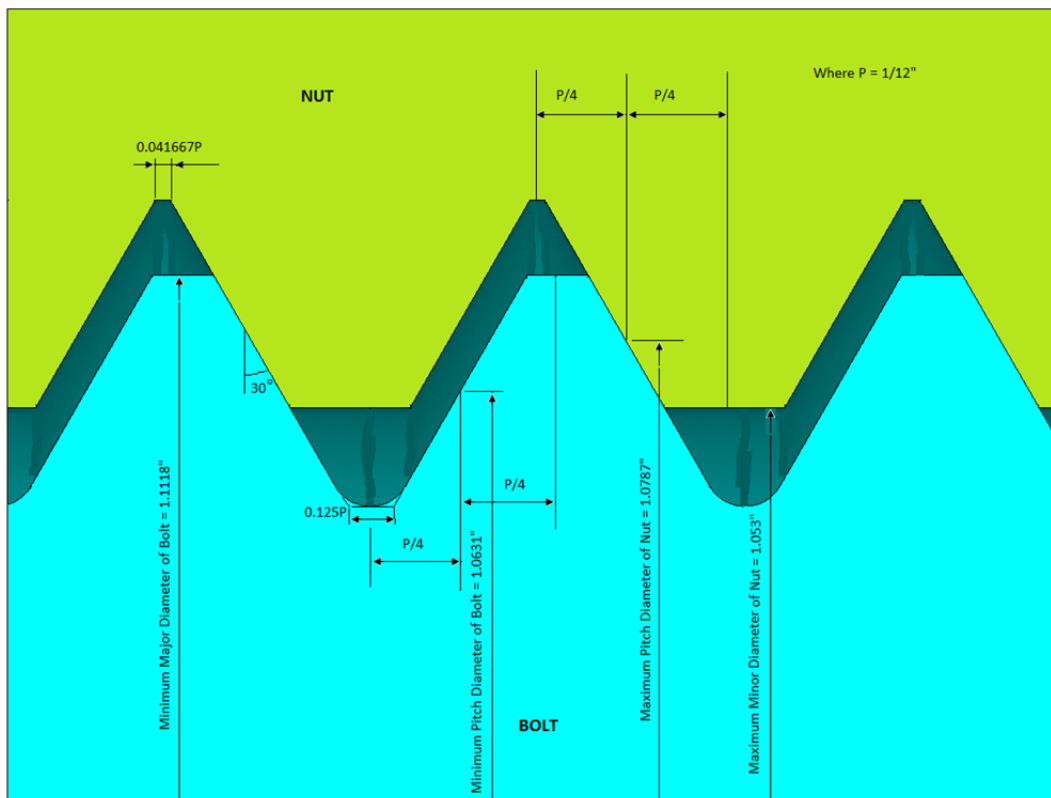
Bolt and Nut Thread Dimensions with Maximum Tolerance [20, p. 1774]
